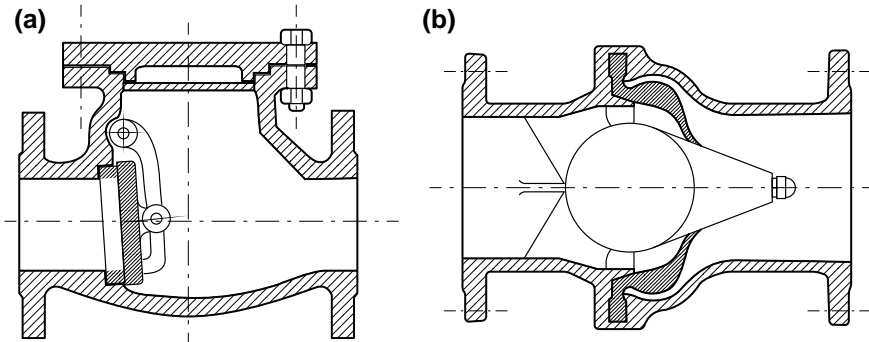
Check valves to prevent water hammers: a swing check valve; b hydrostop type valve
